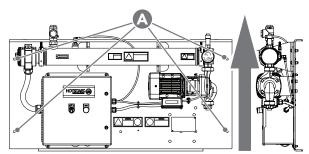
CLP 0.438 inch (11.13 mm) diameter mounting holes × 4 (A). Mount unit in orientation shown. Do not mount at an angle or in any other orientation.
